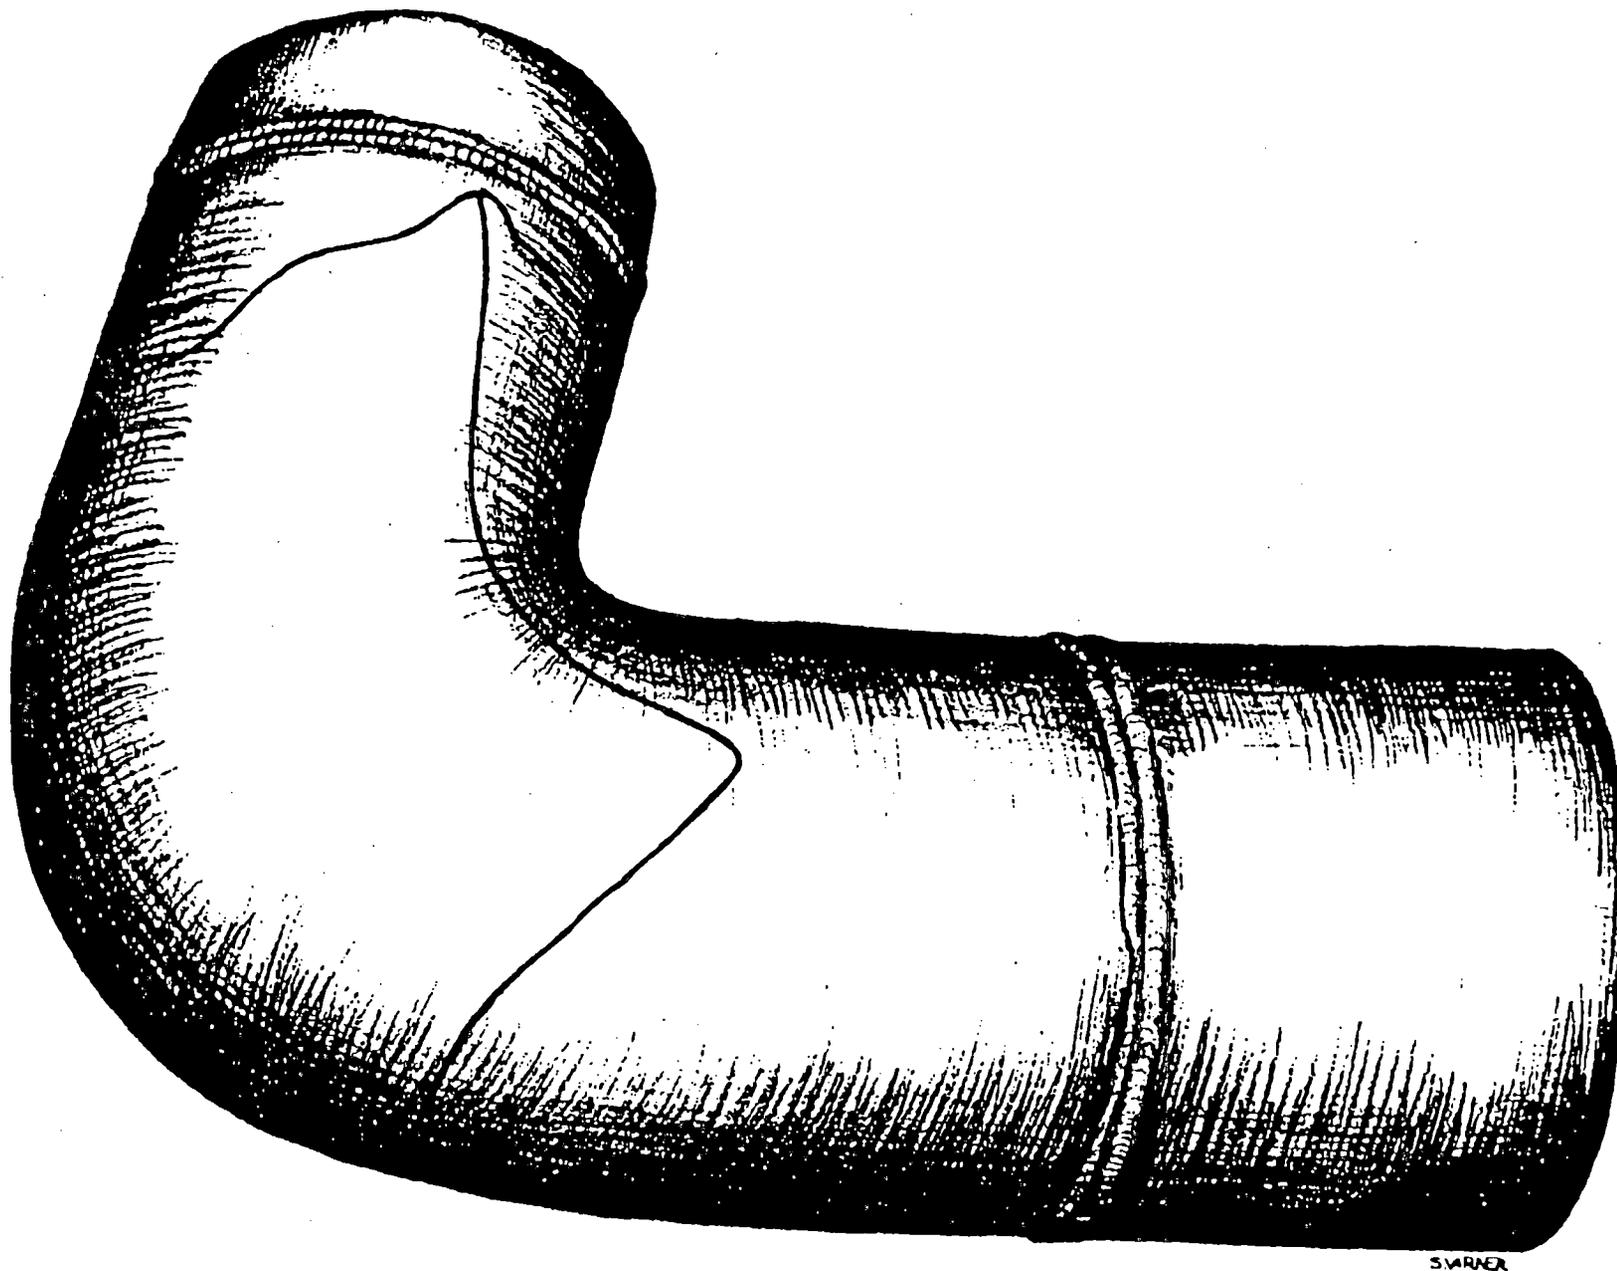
Artist rendering of intact 18" piping elbow with failed section drawn in.
